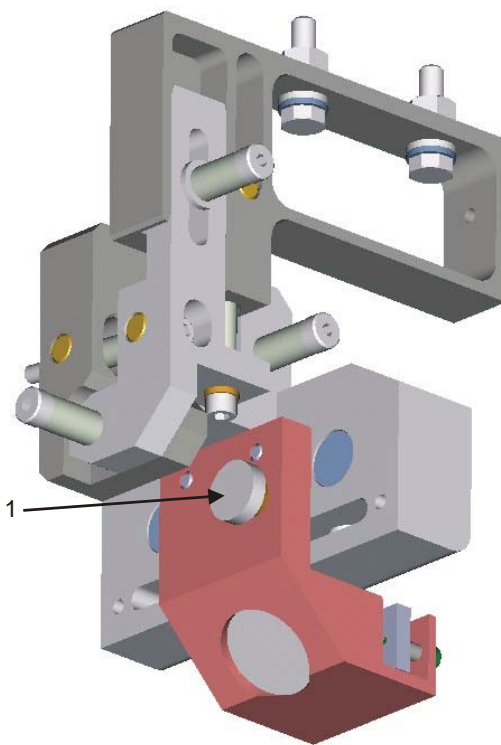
GelView Sensor with Calibration Fixture Attached.
